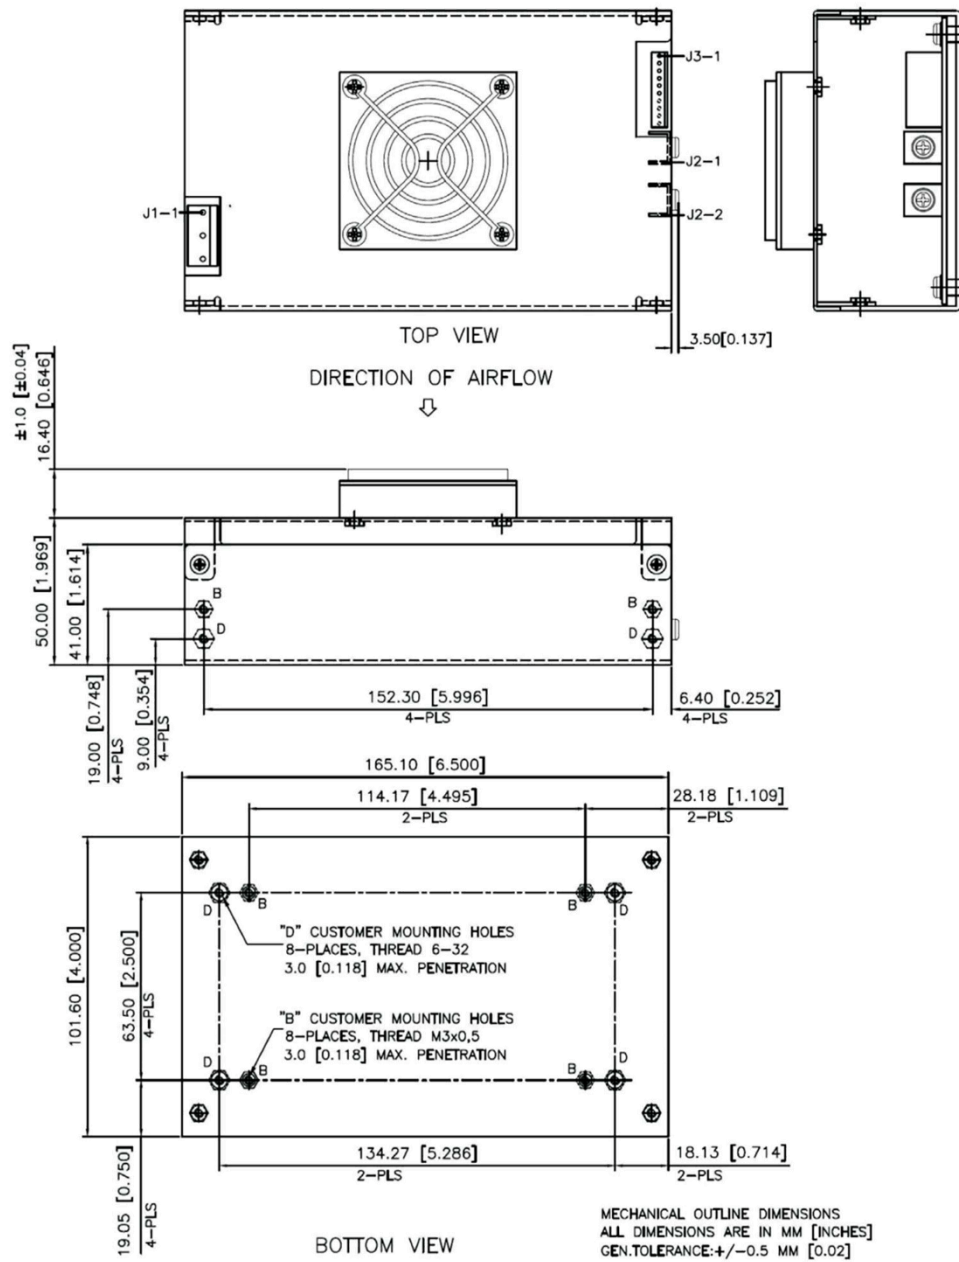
Mechanical Drawing (With Top Fan Mounting)
